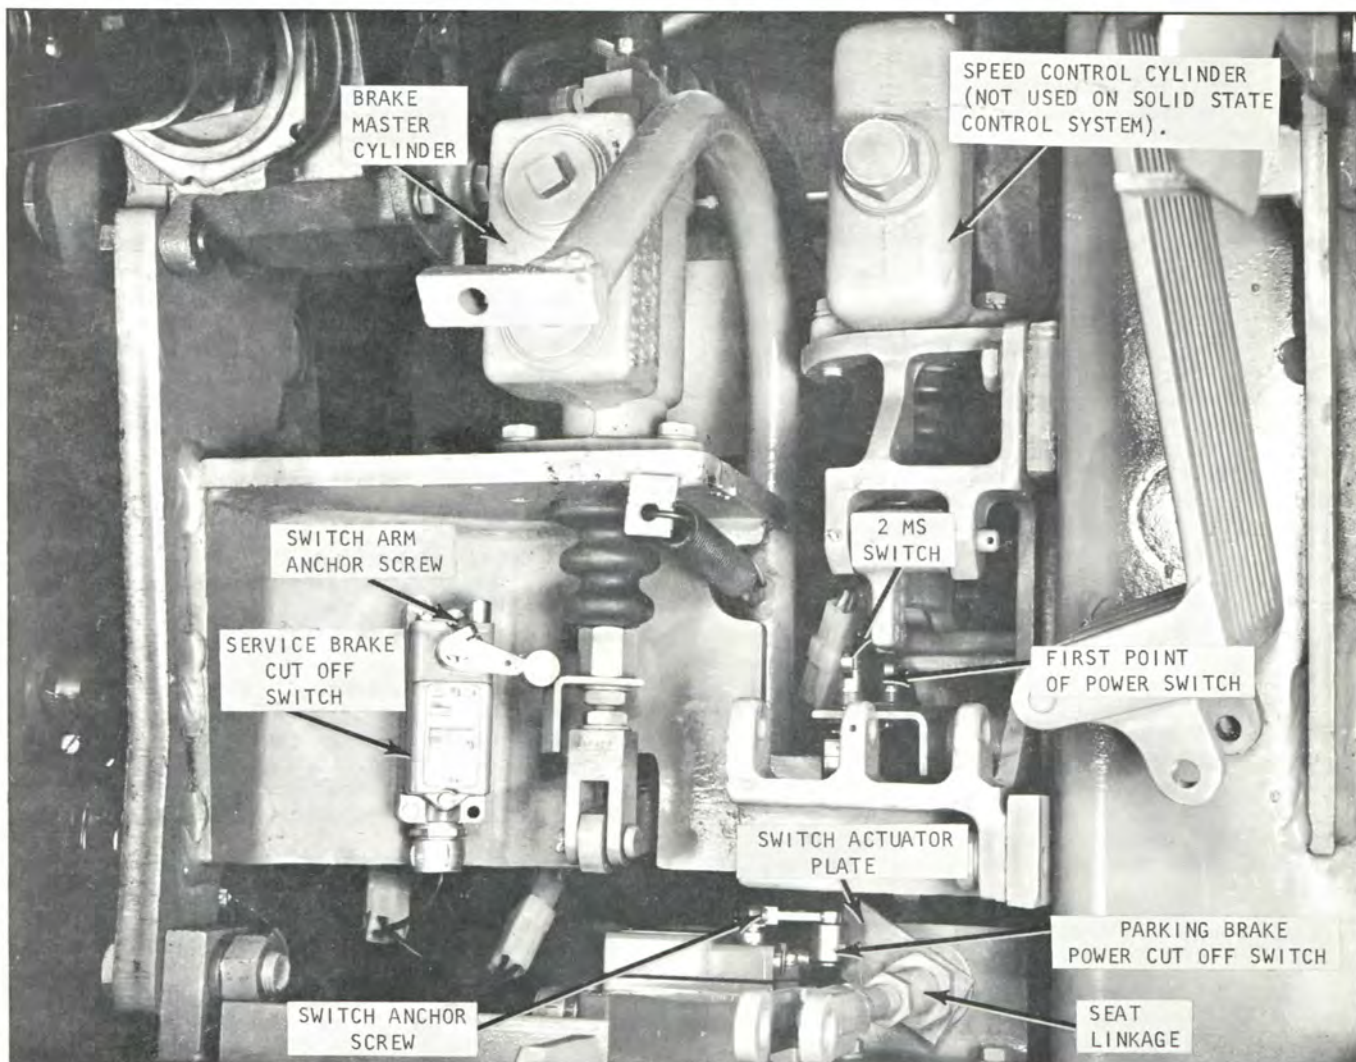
Parking Brake (Deadman) Power Cut Off Switch; check Service Brake (Interlock) Power Cut Off Switch - Typical Illustration
